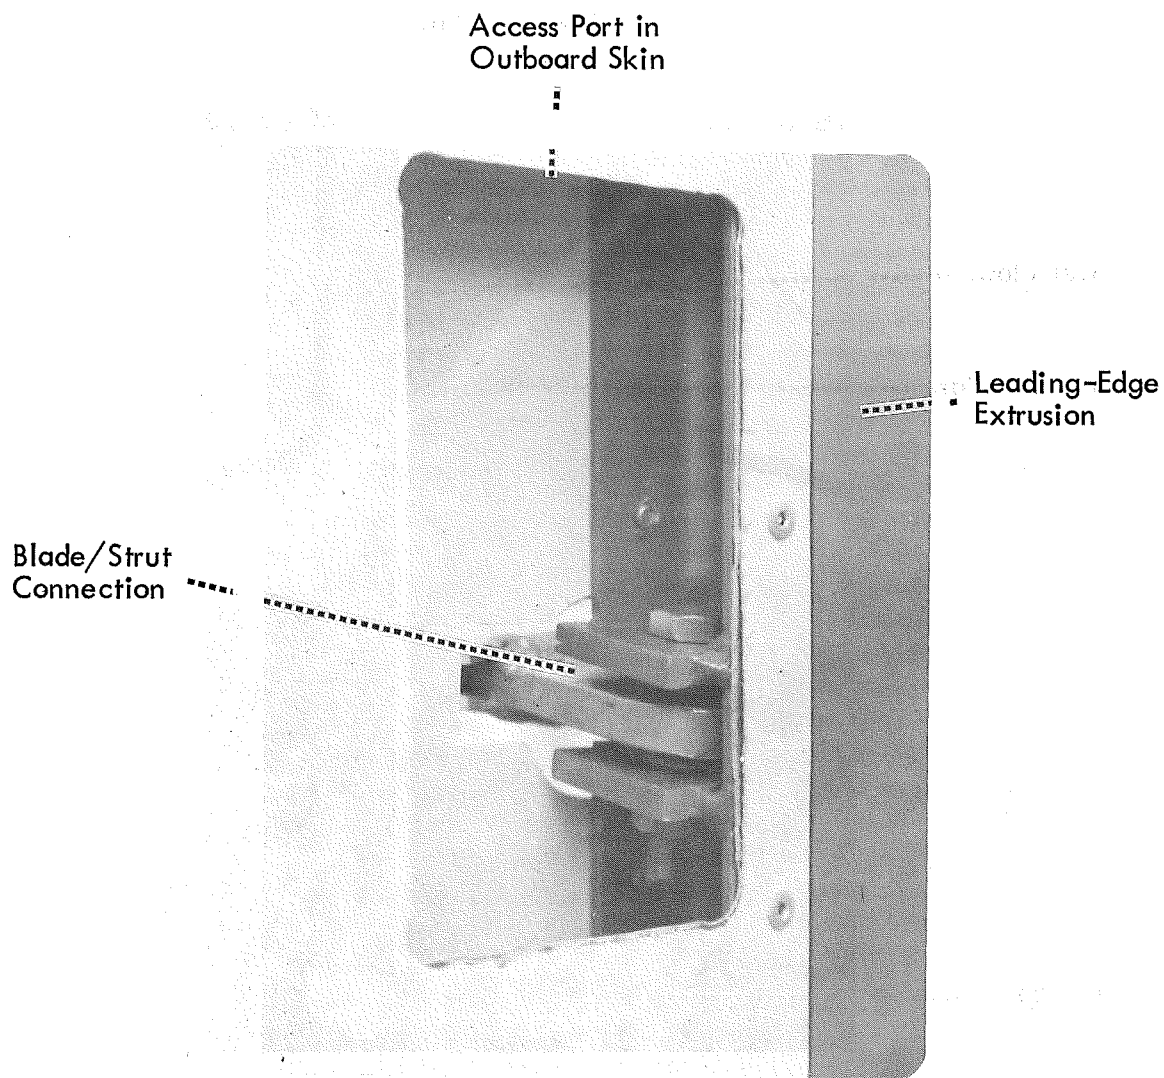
Blade/Strut Connection Viewed Through Outer Surface Opening.
